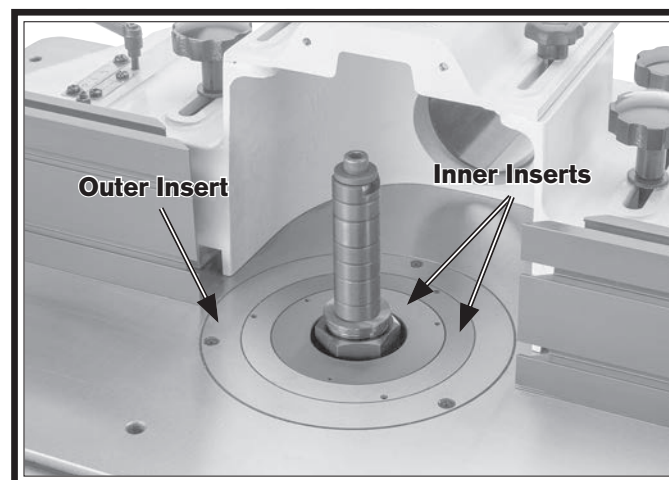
Location of two inner inserts (front cutter guard removed for clarity).
